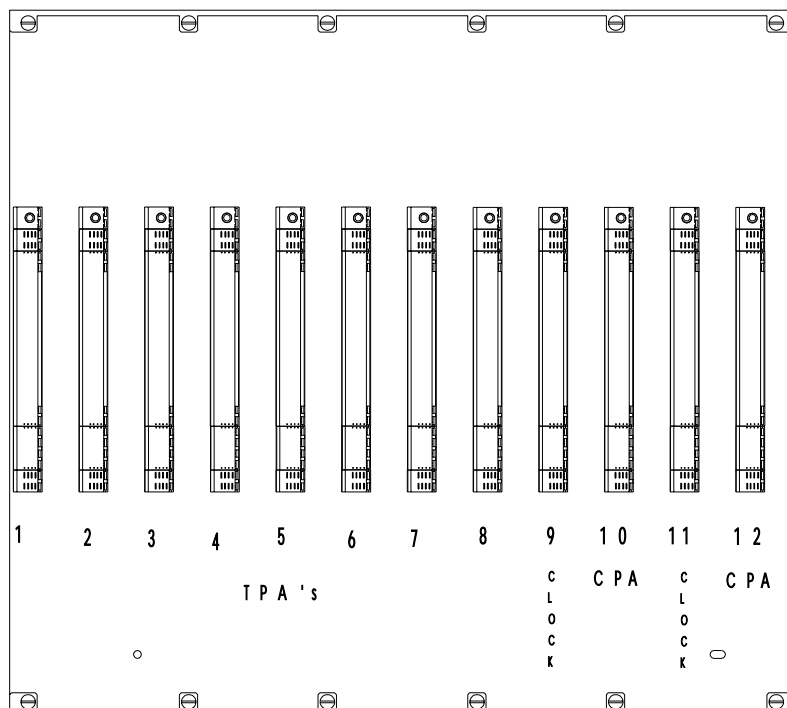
2220 Empty Board Module Location (Front View, Adapter Side)
